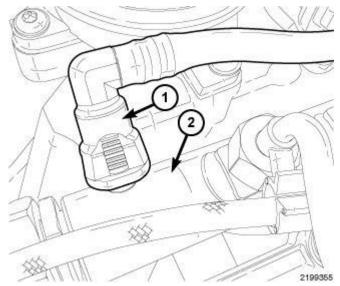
Fuel Return Line & Fuel Rail Courtesy of CHRYSLER LLC
